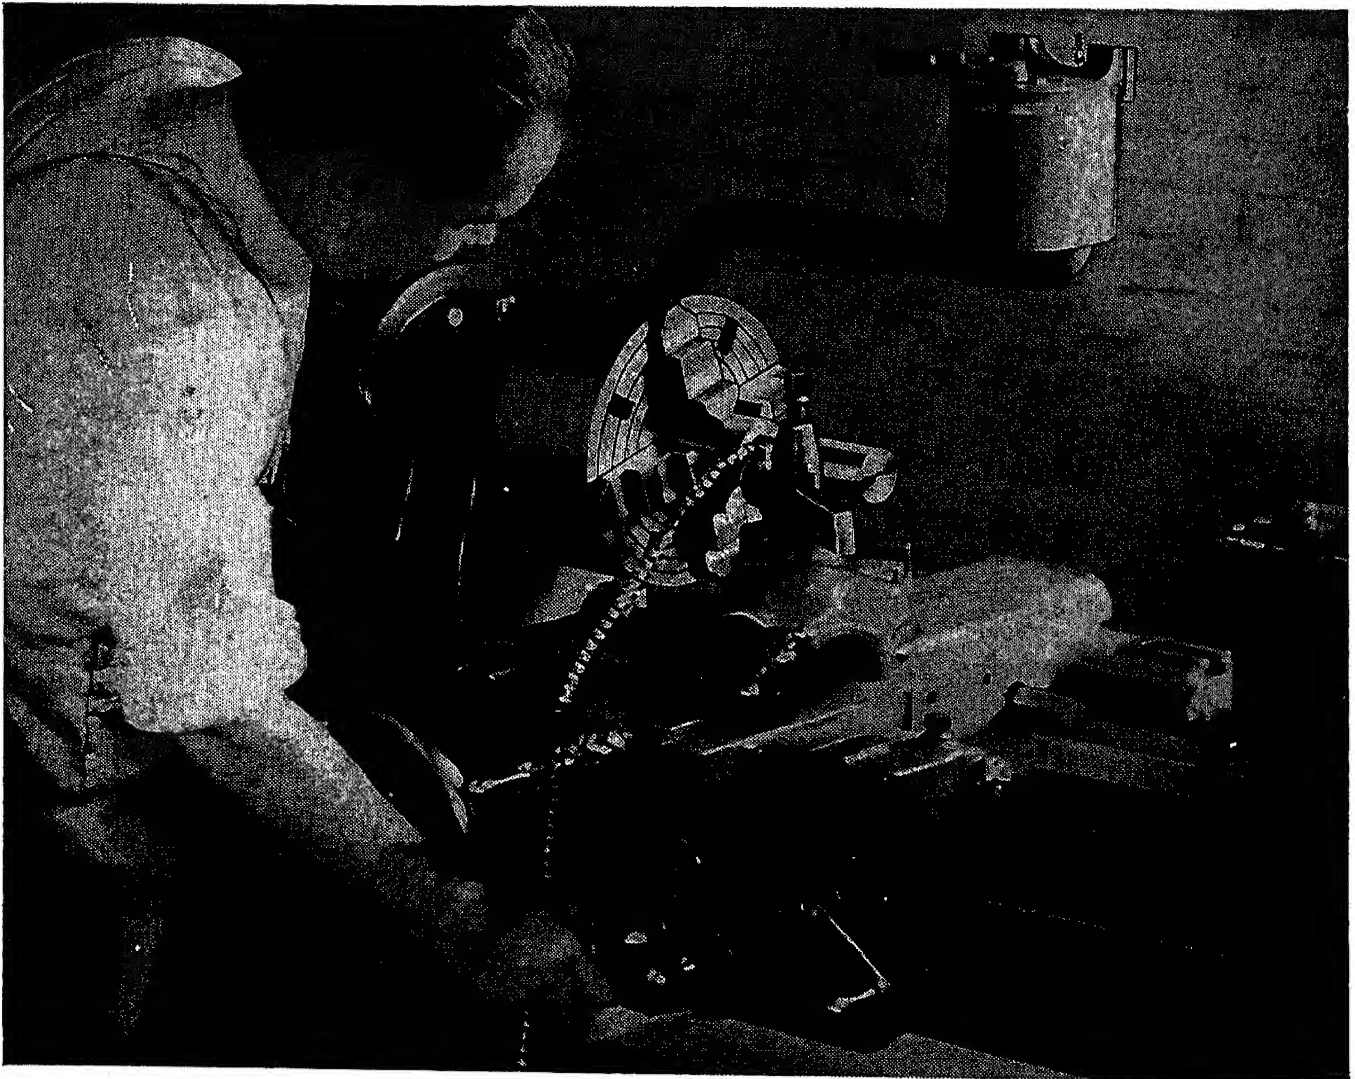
A shaft being turned while gripped in a four jaw chuck. The tool is set forward to avoid interference between the compound rest and chuck jaws. (Courtesy South Bend Lathe Works.)
